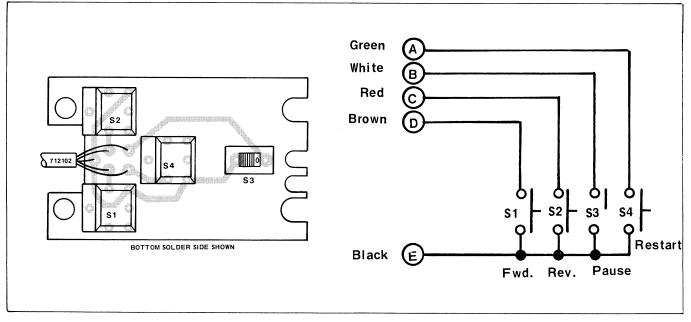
Remote Control Printed Circuit Board (Model 840 Only)
